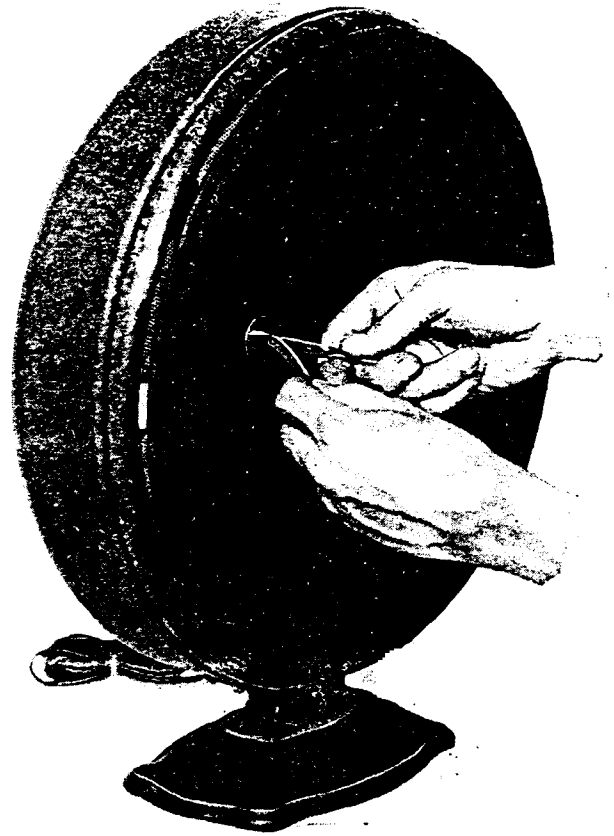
REMOVING CONE, MODELS E AND E-2.
